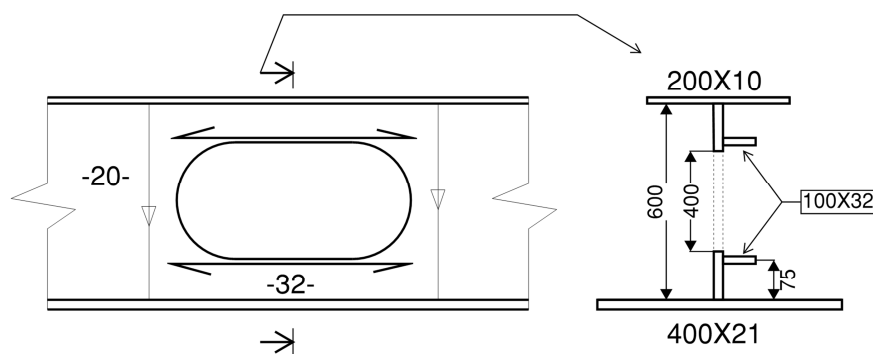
Proposal reinforcement of a perforated girder within the ice reinforced area.
